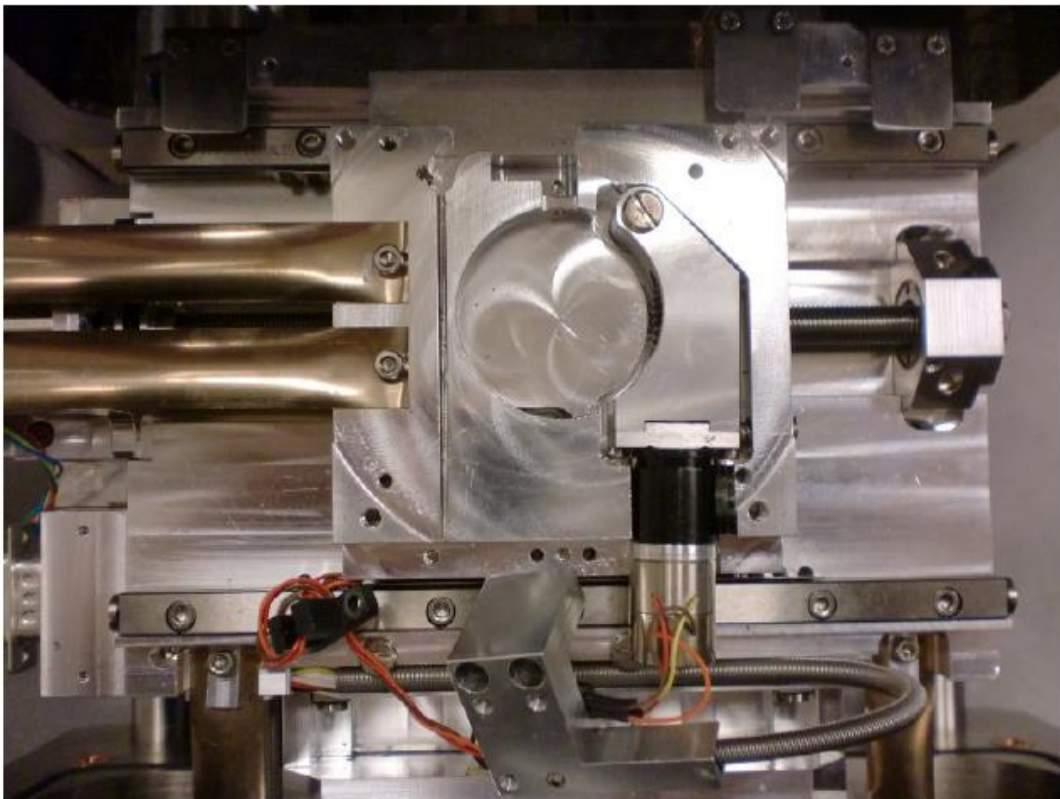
Remove the gold pink (1) and unscrew the marked screws (2)
